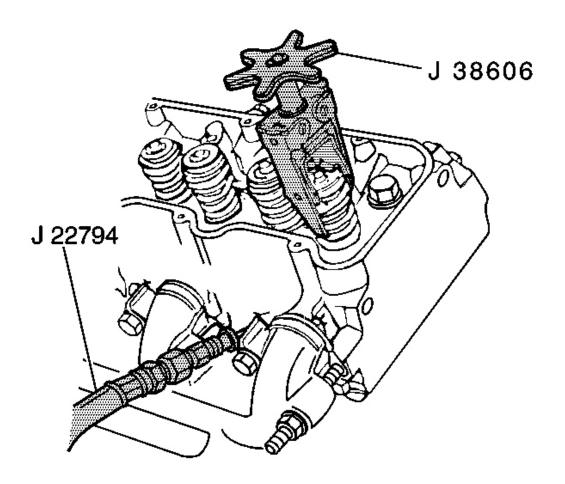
Compress The Valve Spring (Cylinder Head Installed) Using Special Tools Courtesy of GENERAL MOTORS CORP.
